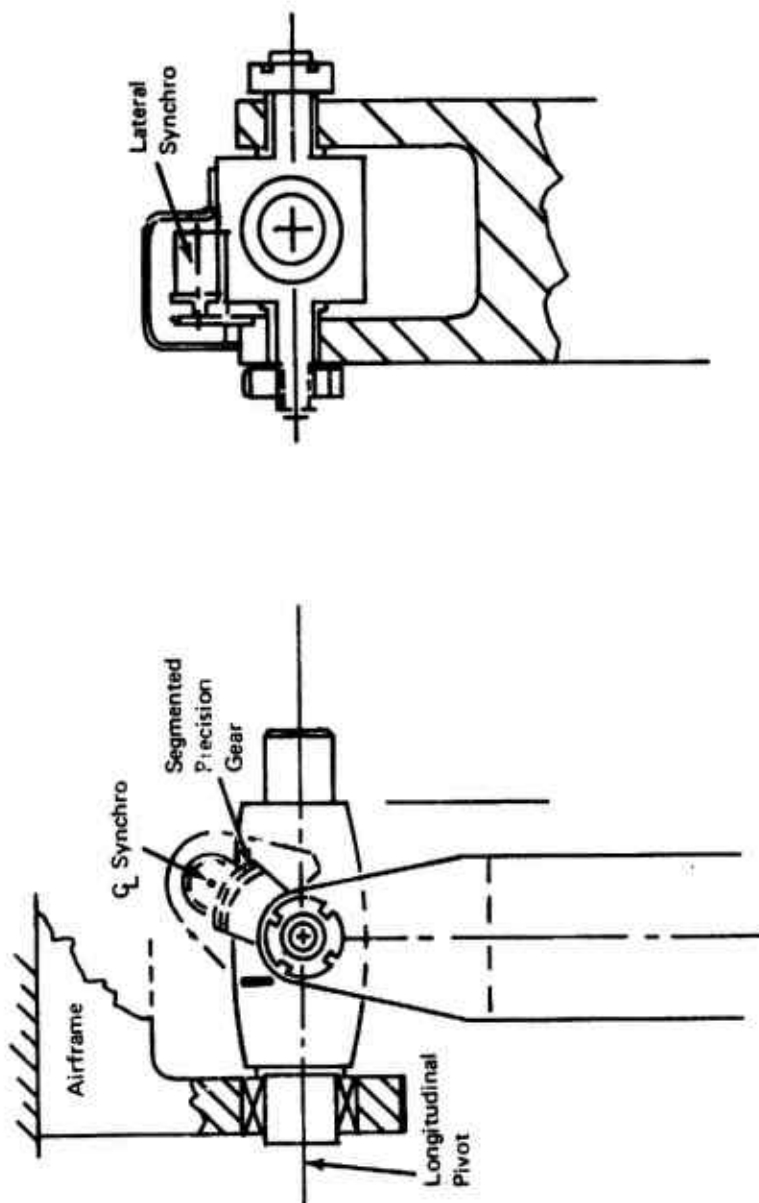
Upper Joint Arm Bearing/Sensor Configuration.
